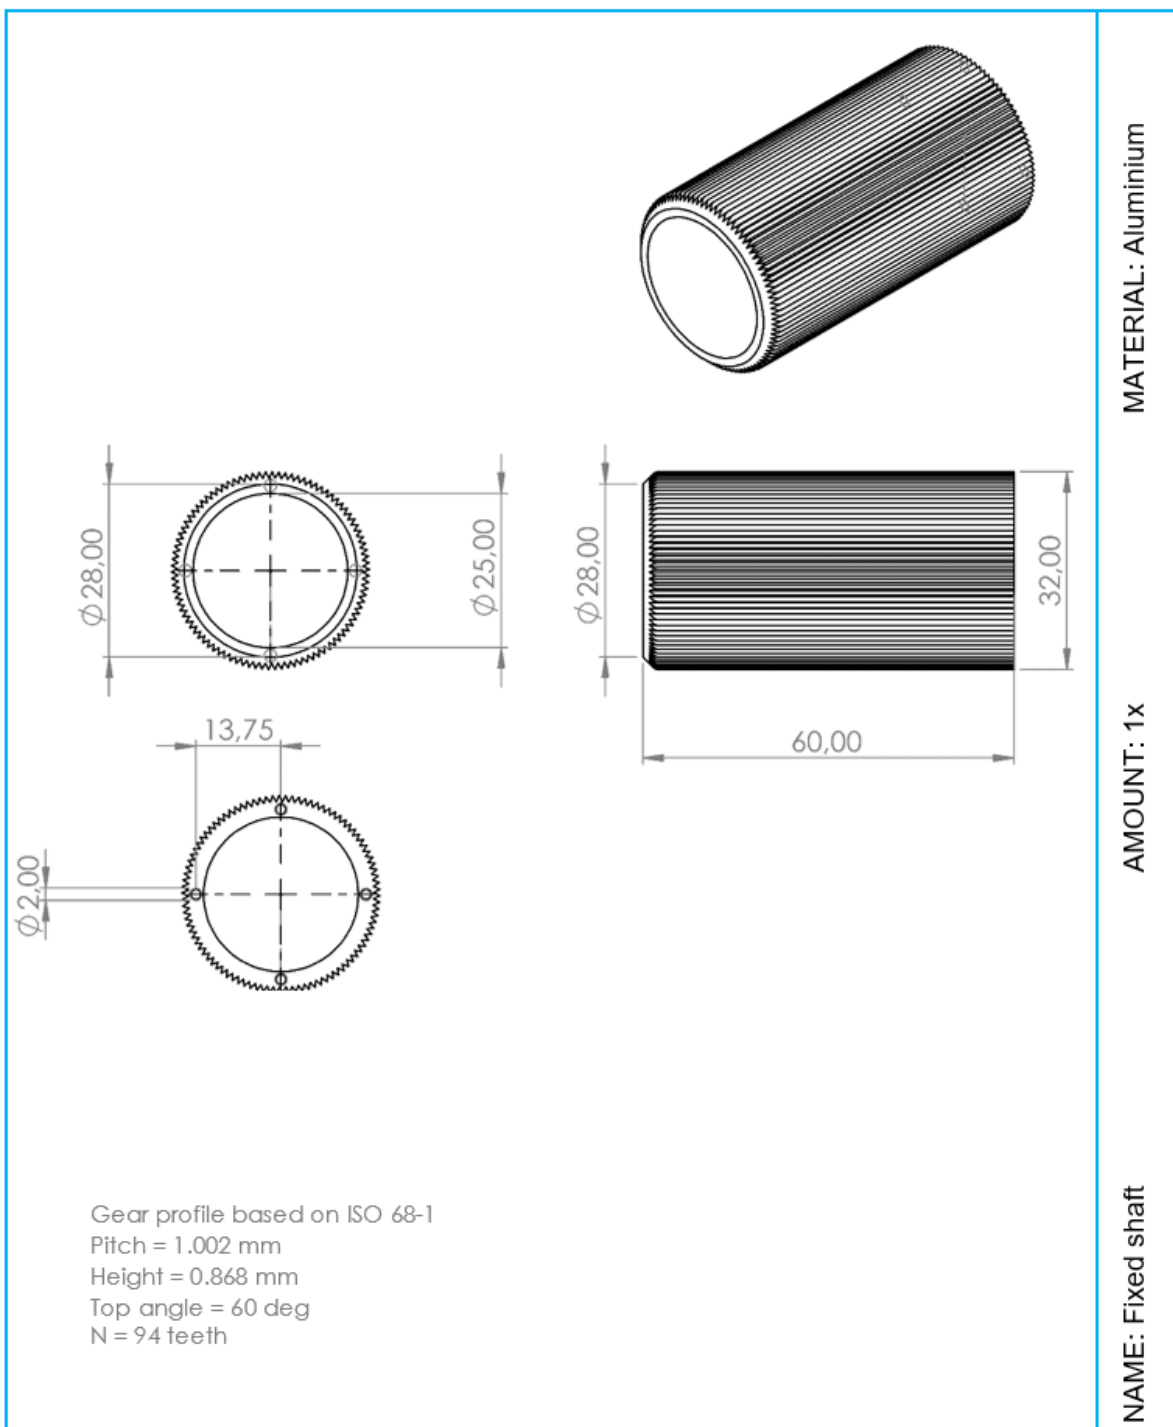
Construction drawings of the fixed shaft - Machined prototype
